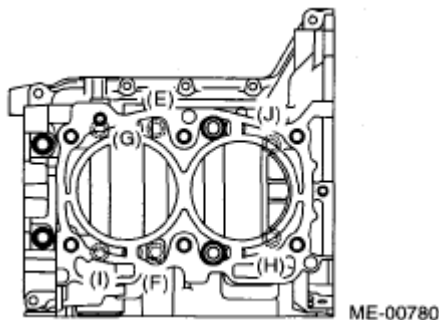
Identifying Cylinder Block Connecting Bolts Alphabetical Sequence
